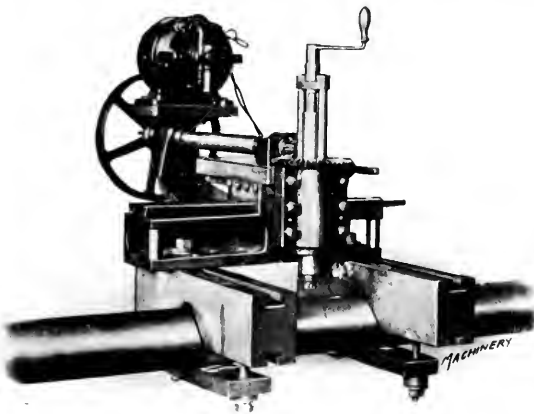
Pedrick Machine milling a Keyway in a Shaft
